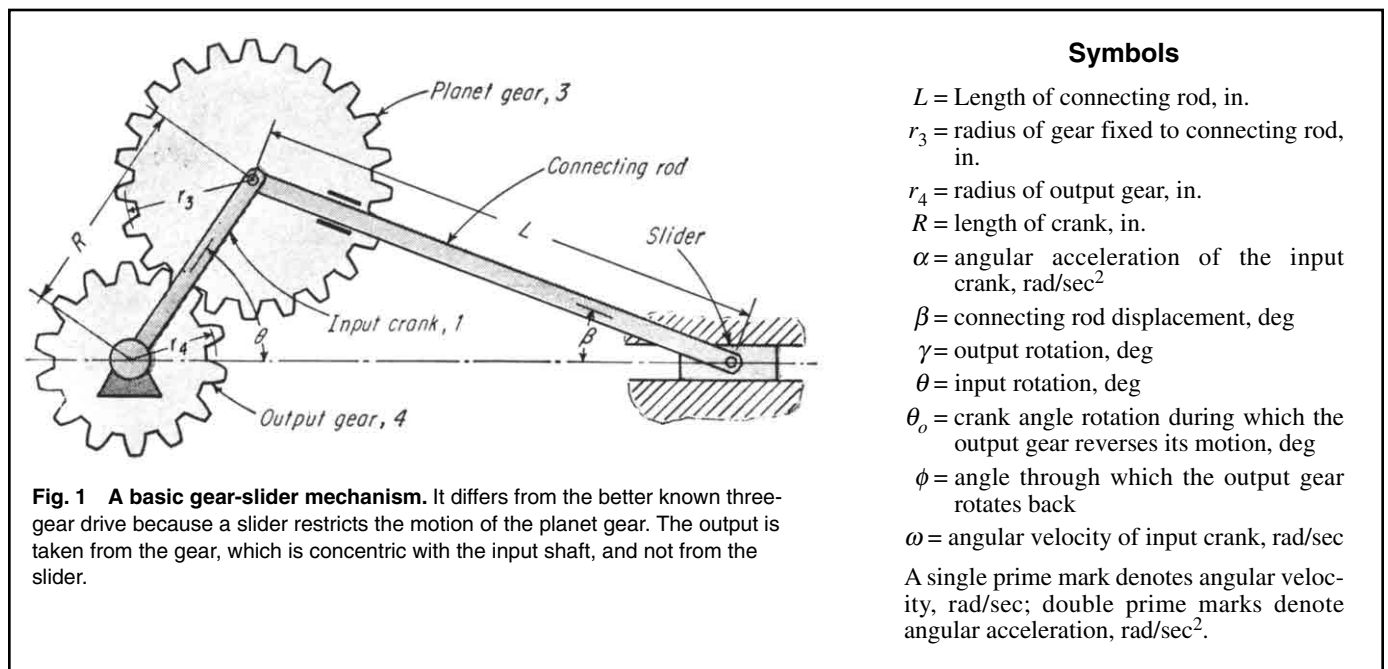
A basic gear-slider mechanism. It differs from the better known three-gear drive because a slider restricts the motion of the planet gear. The output is taken from the gear, which is concentric with the input shaft, and not from the slider.
